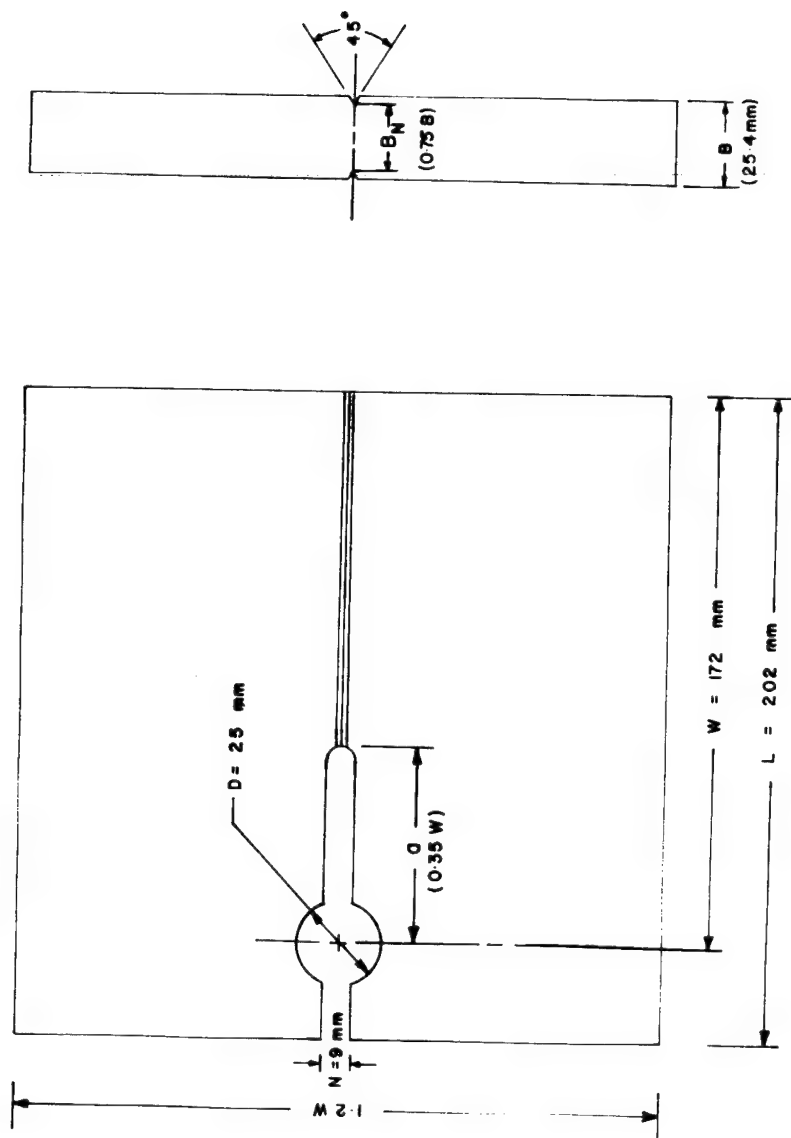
Dimensions of the Modified Compact Tension Specimen.
